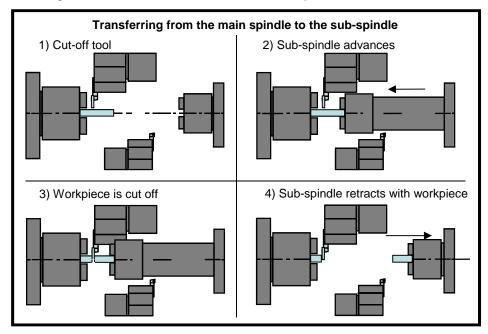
Transferring a workpiece from the main spindle to the sub-spindle
